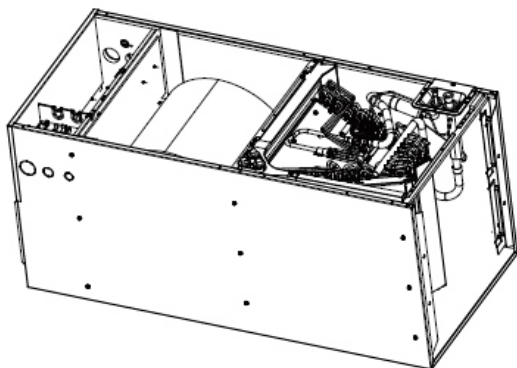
J — Reinstallation of Drain Pan Fixed Plate and Auxiliary Support Plate
